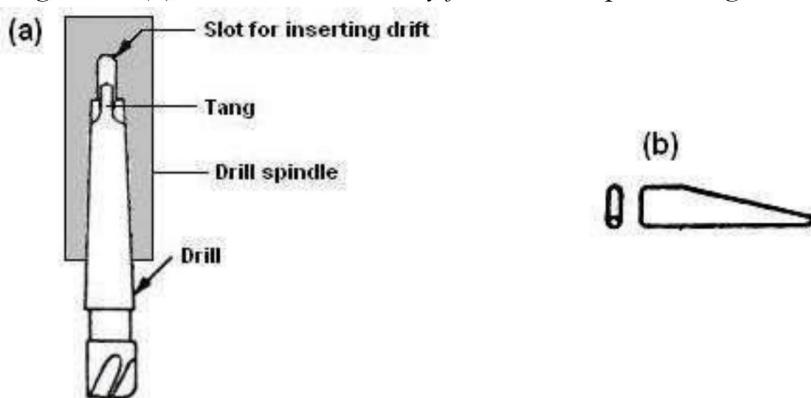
(a) Drill directly fitted in the spindle and (b) Drift or key
